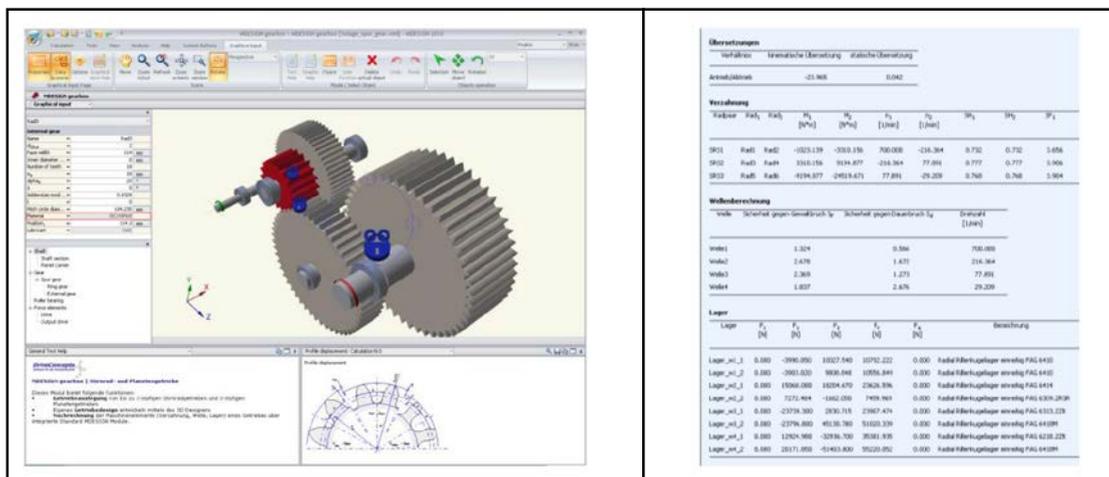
User interface of MDESIGN gearbox with 3-D-GearDesigner and result page (Ref. 10).
